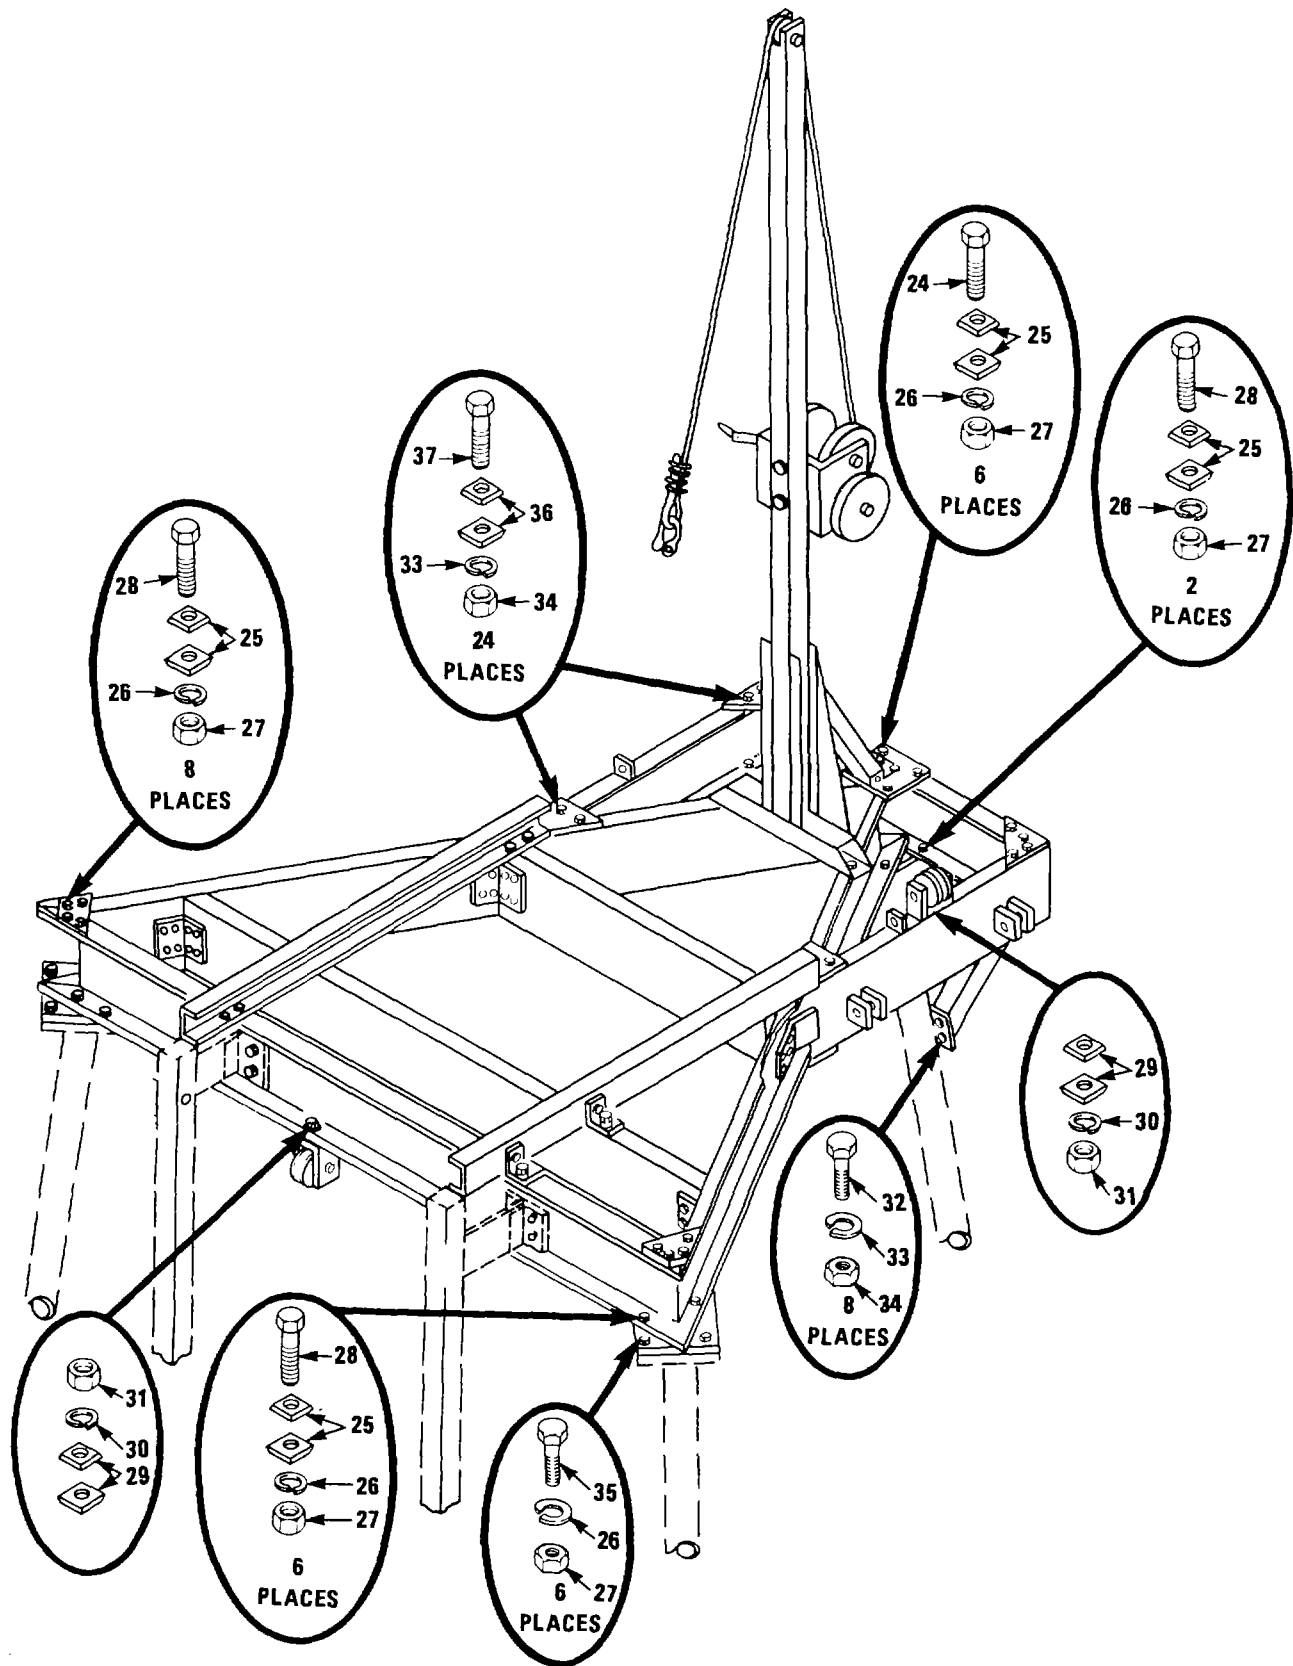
Tower Adapter Installation (Sheet 2 of 4)
